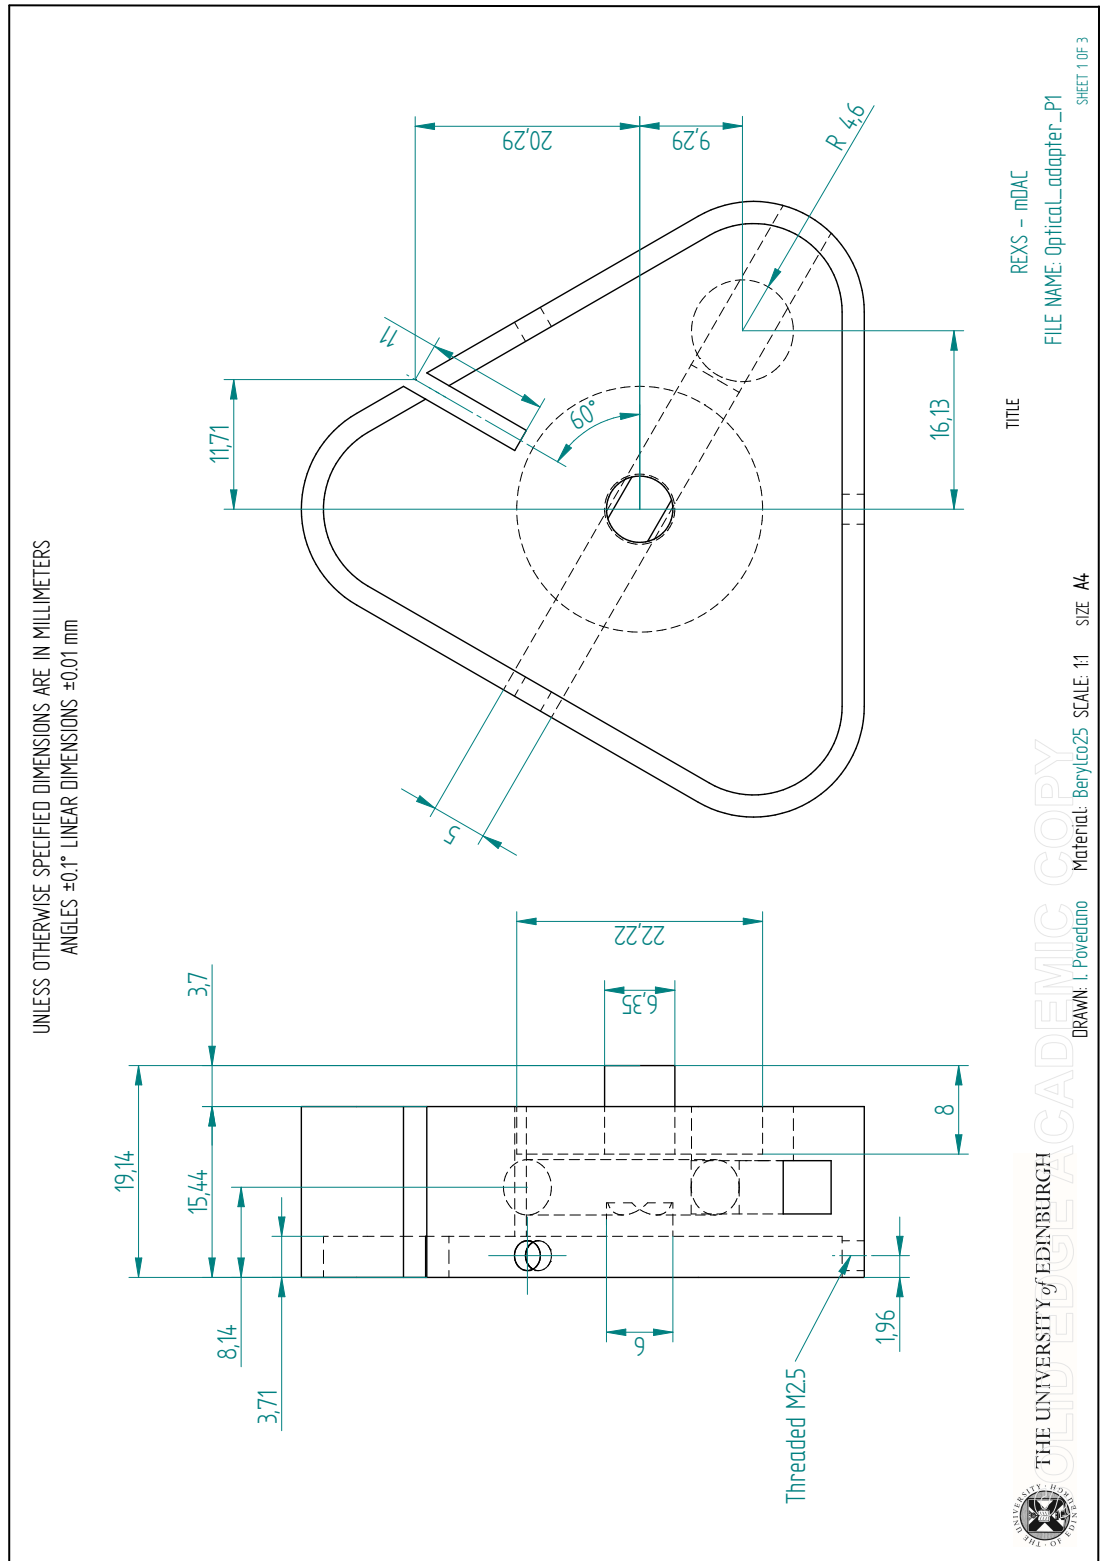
Optical holder prototype 1. Sheet 1 of 3.
